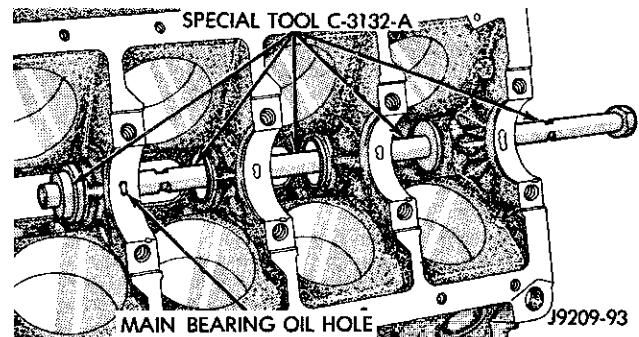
Camshaft Bearings Removal/Installation with Tool C-3132-A
